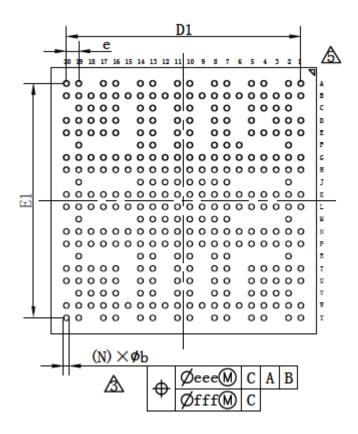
PX3 SE TFBGA316 Package Bottom View
